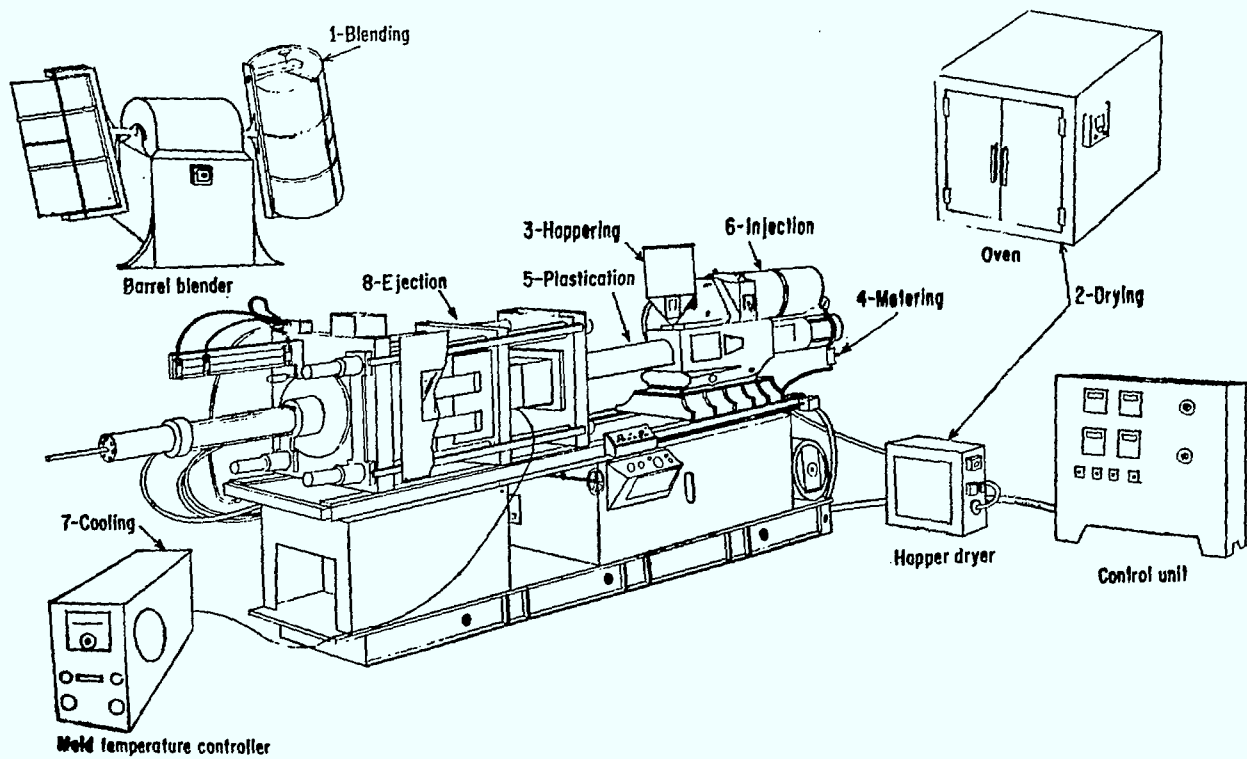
OVERVIEW OF INJECTION MOLDING MACHINE
